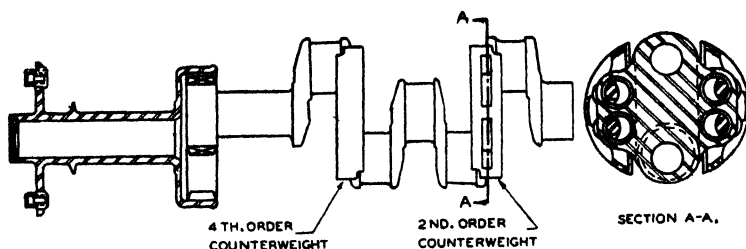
LYCOMING FOUR-CYLINDER CRANKSHAFT DOUBLE PENDULUM DAMPER
